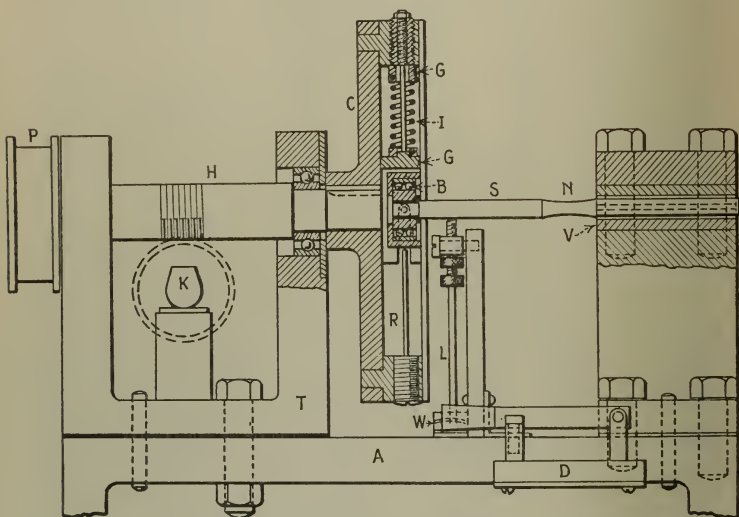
Diagram of Rotating-Spring Reversed Bending Testing Machine Used by Moore.
